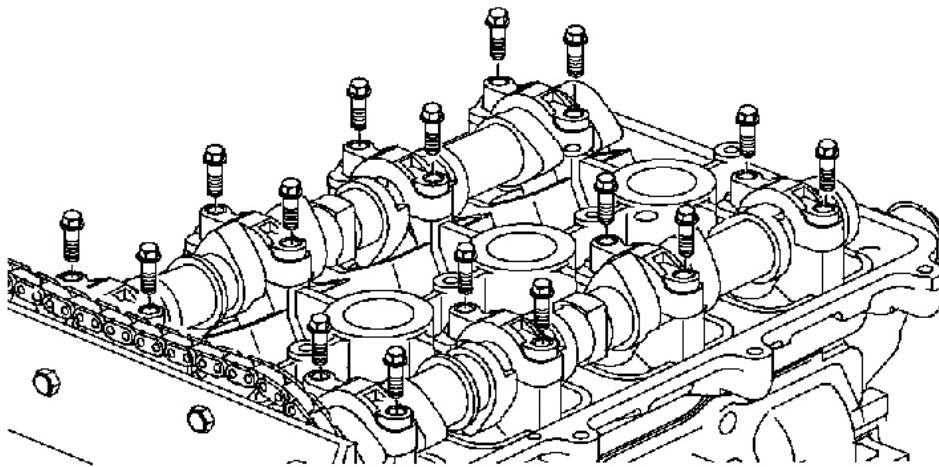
Removing/Installing Camshaft Bearing Cap Bolts
